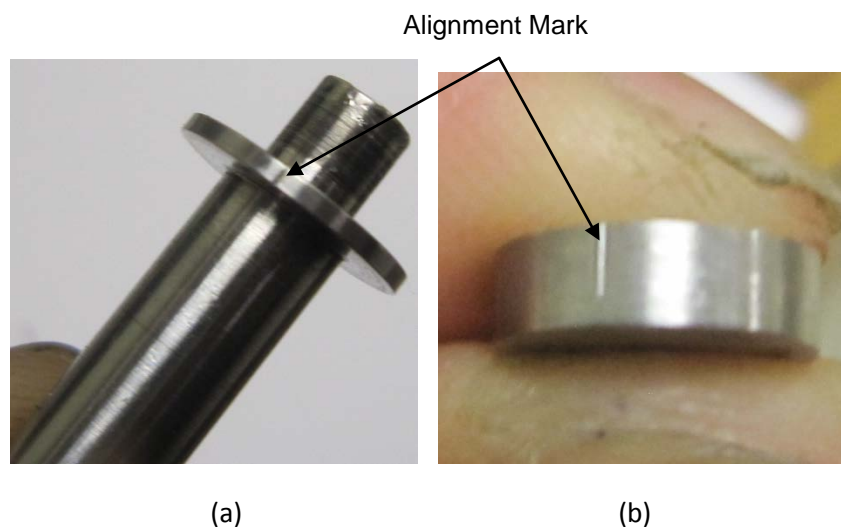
Alignment mark in the (a) Rotor and in the (b) Dummy impeller
